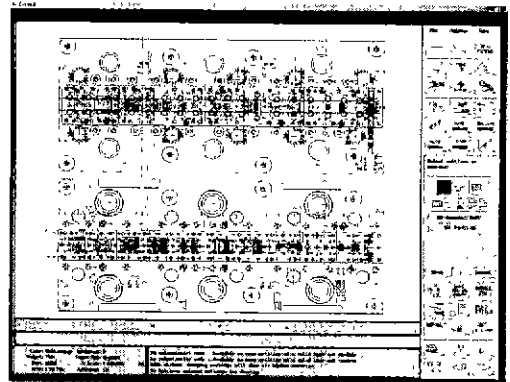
A drawing of die set of the internal leads generated in the die layout module
